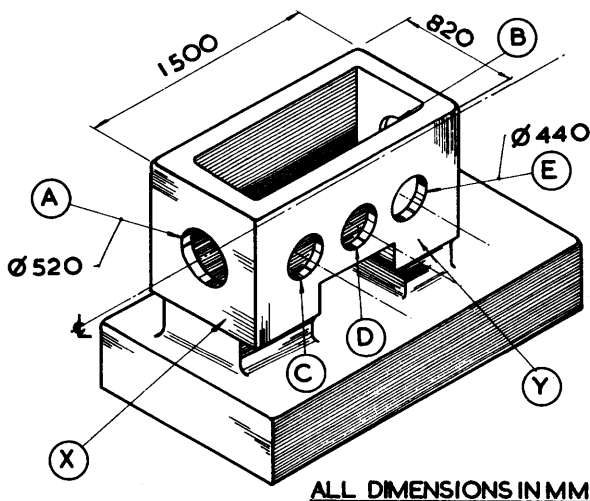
Typical Component for Horizontal Boring Machine.
